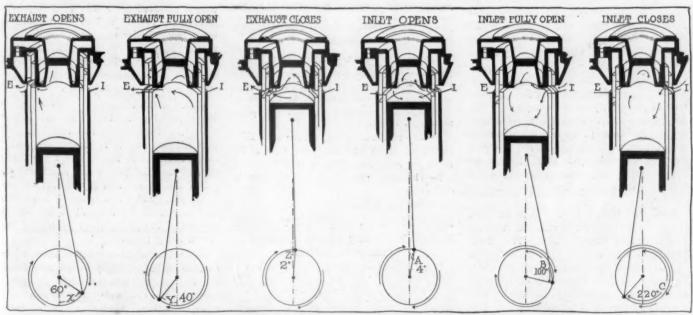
VALVE TIMING OF KNIGHT ENGINE; STARTING WITH THE ILLUSTRATION AT EXTREME LEFT
